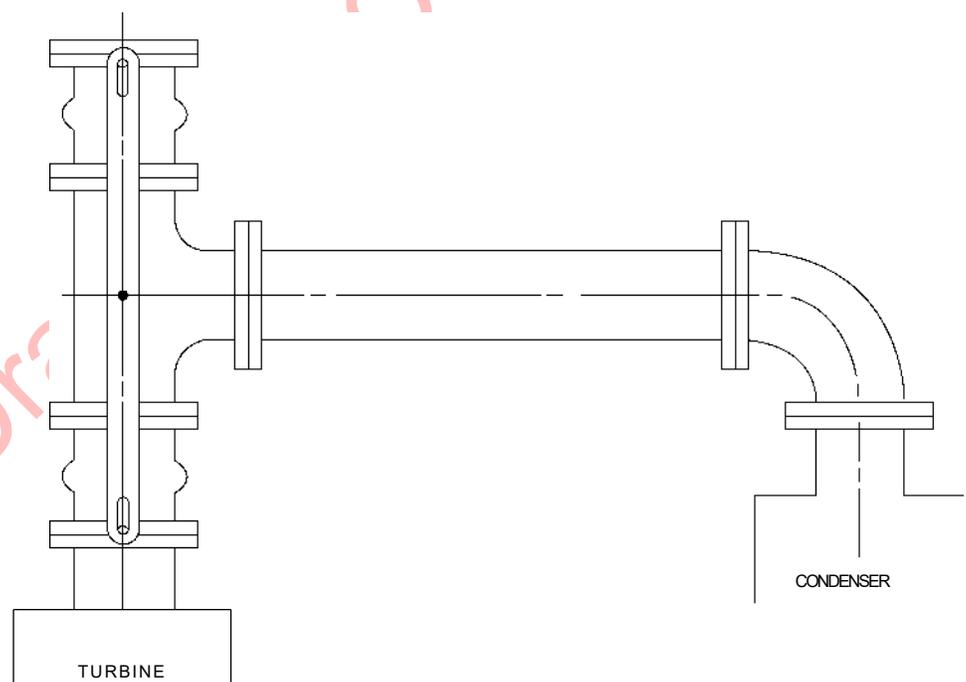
Condensing Turbine Expansion Joint with "UP" Exhaust
